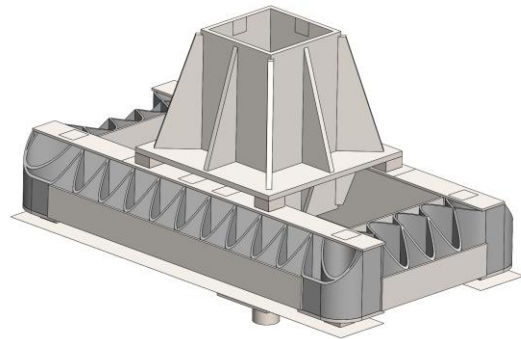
Isometric view of final WAAM print geometry with steel plates and mock Z- and X-axis assembly.
